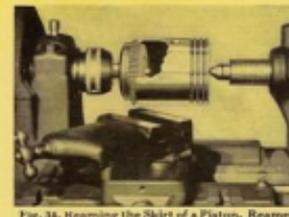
Reaming the Skirt of a Piston, Reamer is held on Piston Adapter Shank.
